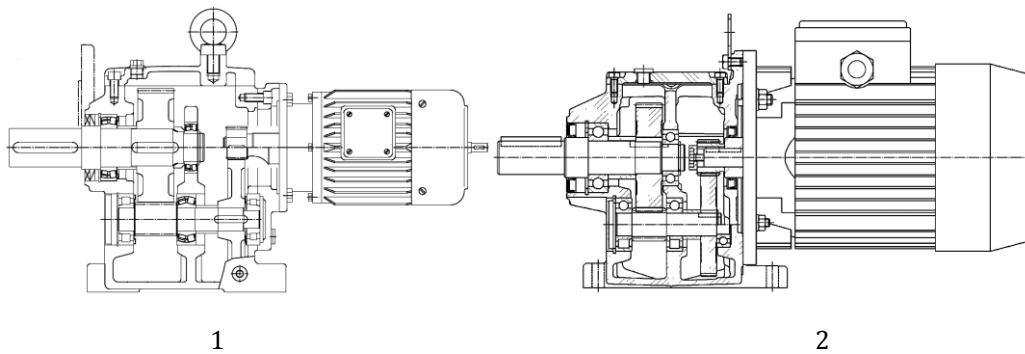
Characteristic solutions of two-stage universal gear reducers manufactured in universal housing for two-stage and three-stage gearbox: (1) Nord and (2) Rossi.
